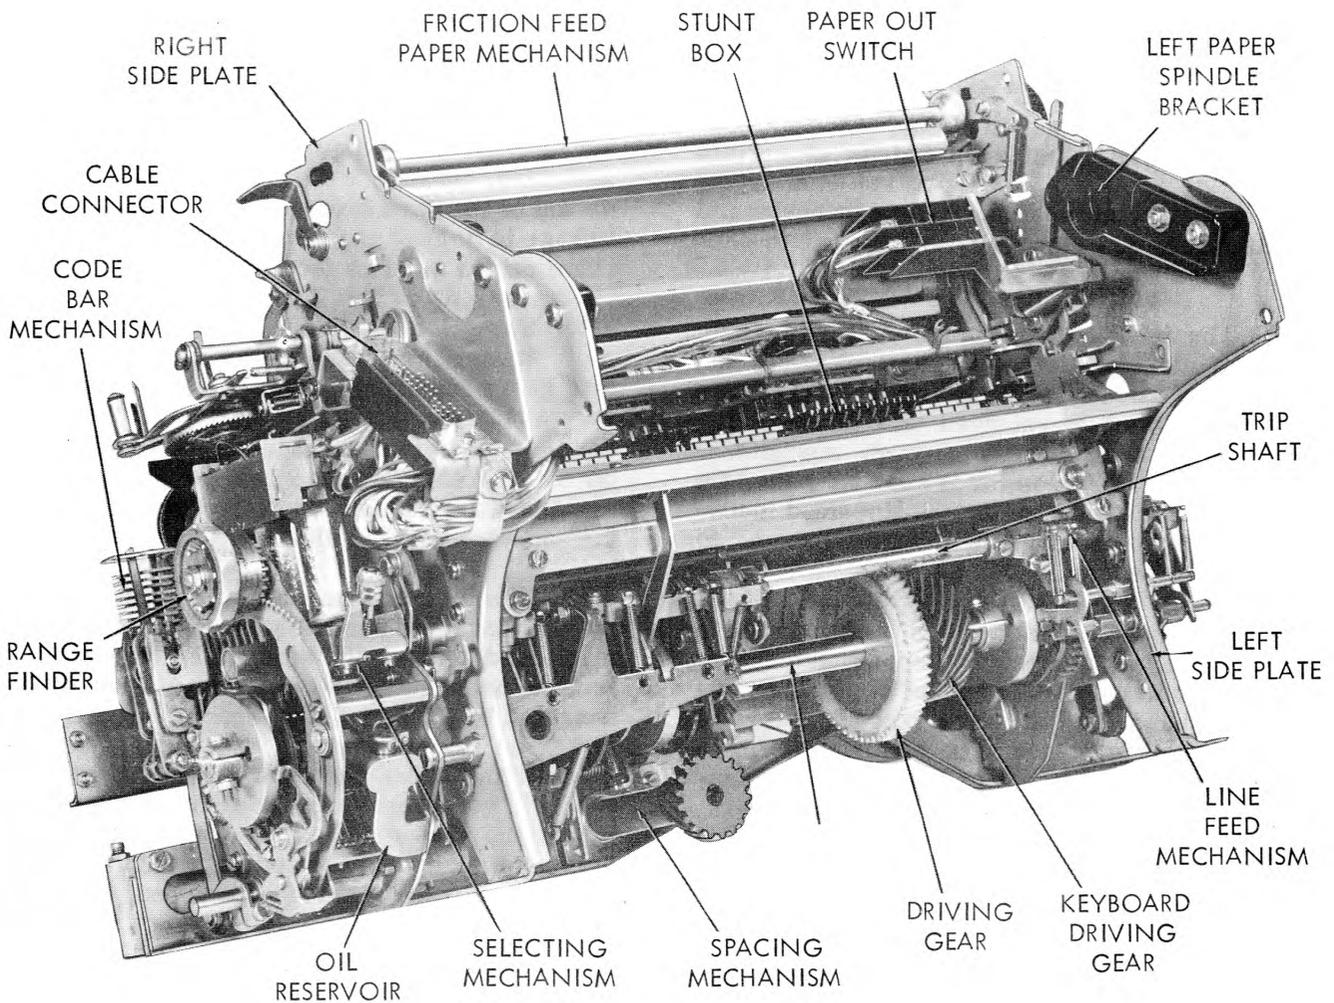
35 Typing Unit (Friction Feed) (Right Rear View)
